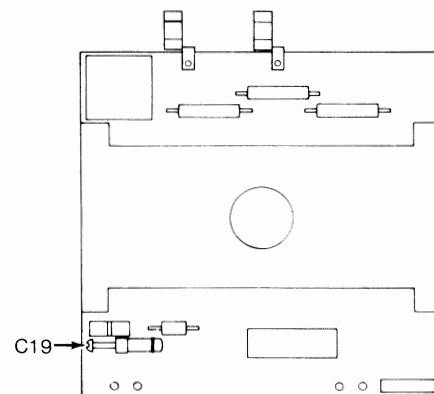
Small Circuit Board Assembly (RMS 3030)
